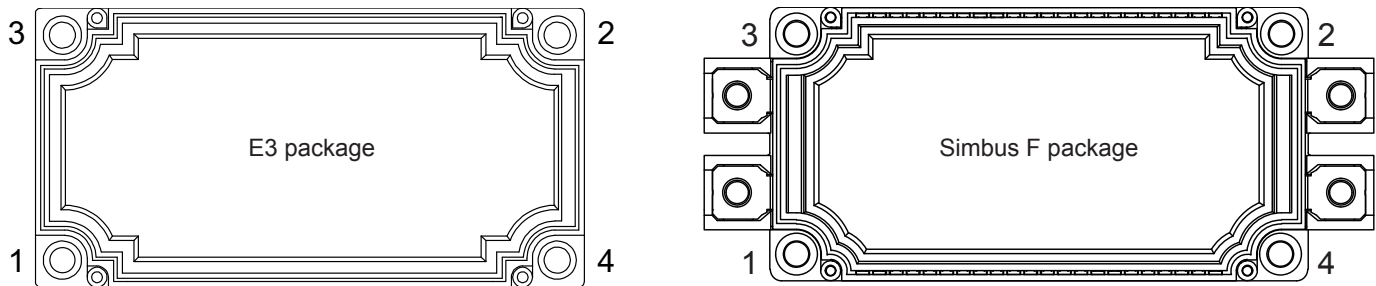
Step pattern for M5 screw tightening (E3 and SimBus F package)
